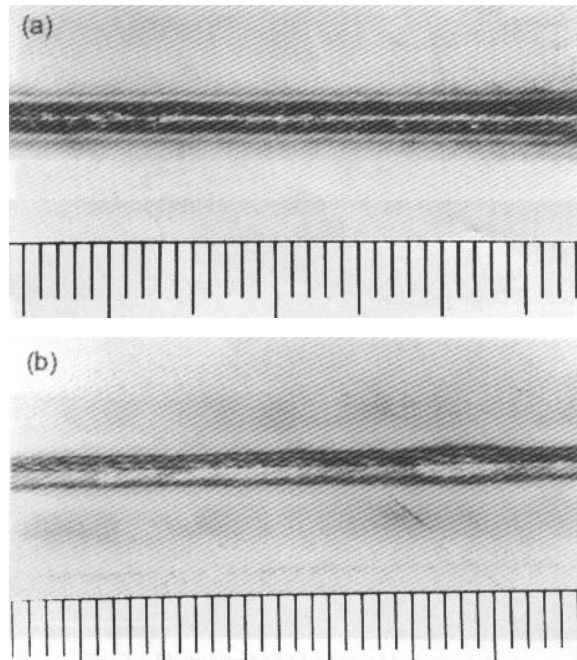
Macrographs of laser welds made using (a) argon and (b) helium as a shielding gas with 30 l/min flow rate.
